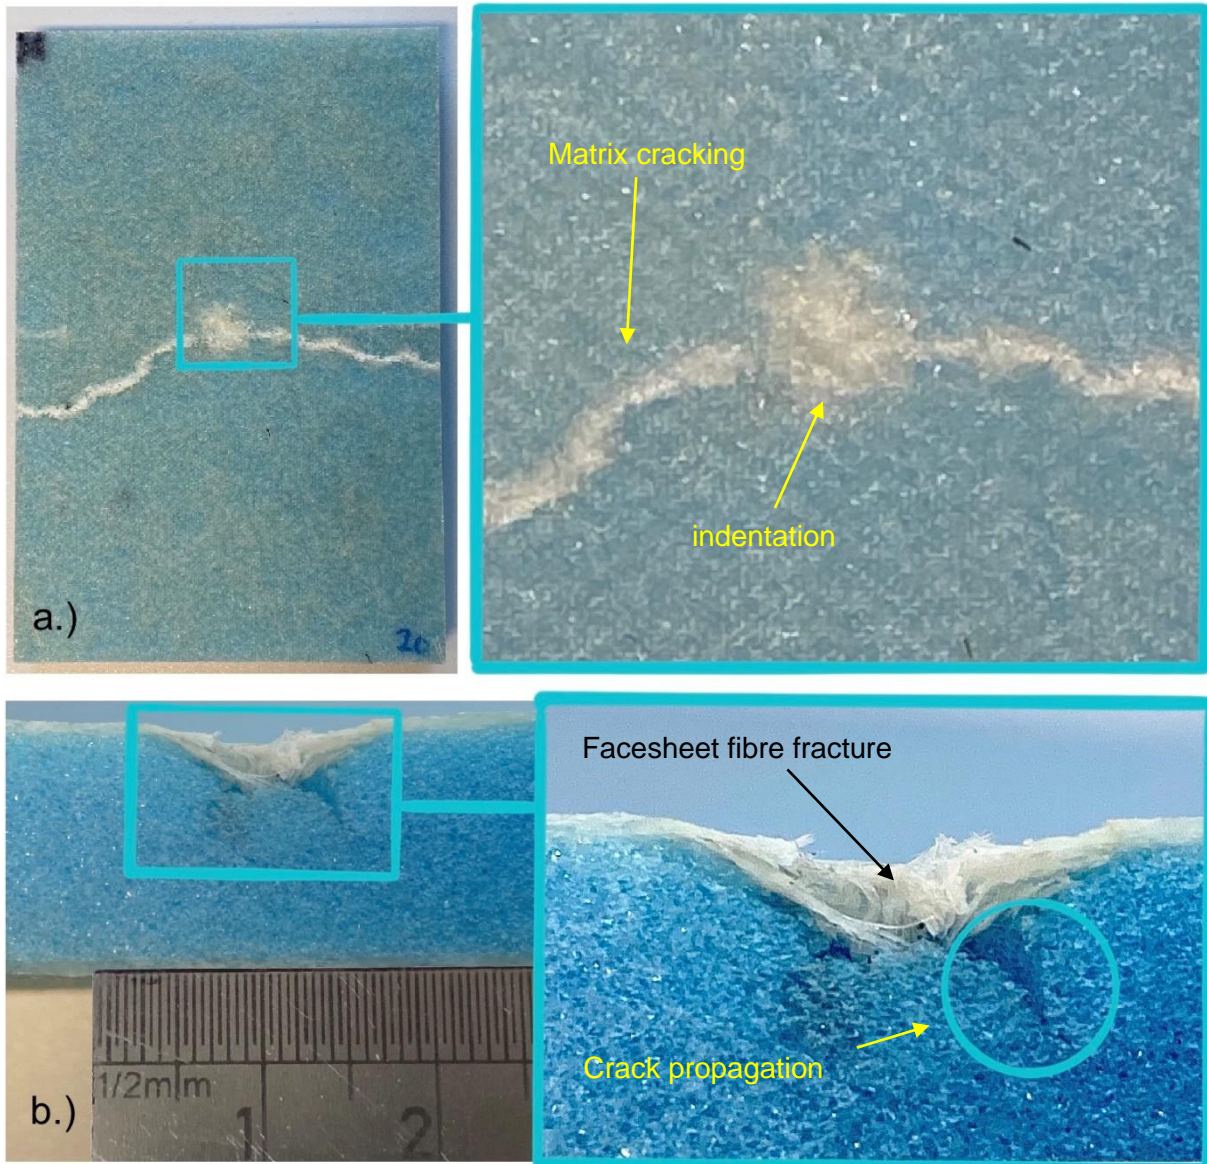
a.) Top facesheet view and b.) cross sectional view of impacted CSMG specimen at 20J
